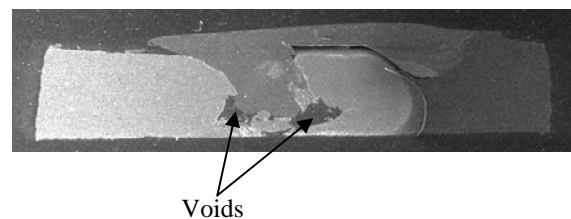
(c): Macrograph of weld produced at 600 rpm and 300 mm/min.
